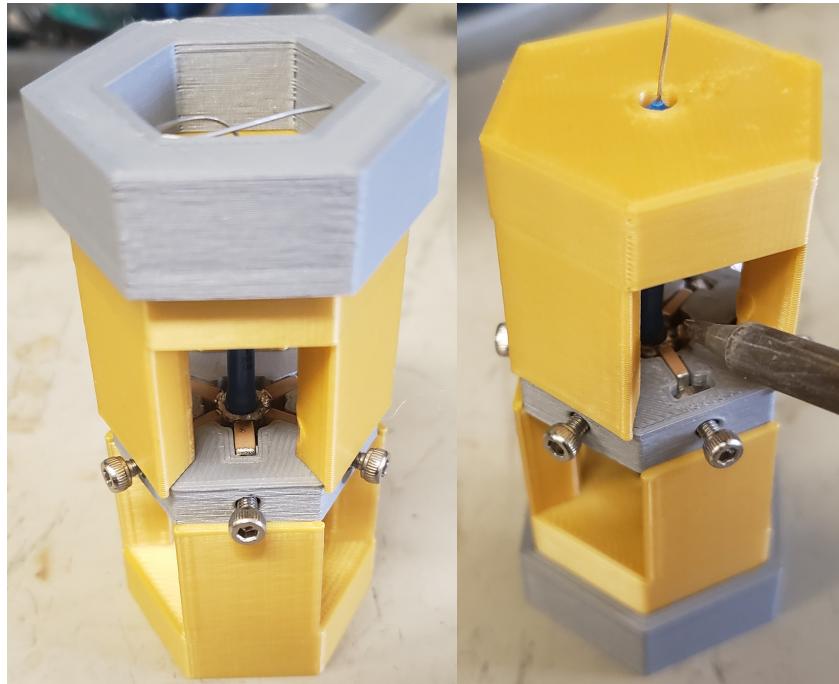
Attaching resistors using jig. Left: Input resistor in jig for attaching to capacitor array. Shown after soldering with lead bent into spring shape. Right: Output resistor in jig. Note the upper part of the jig doesn't quite rest flat against the rest of the jig because the resistor end doesn't quite fit the jig, but it's close enough.
